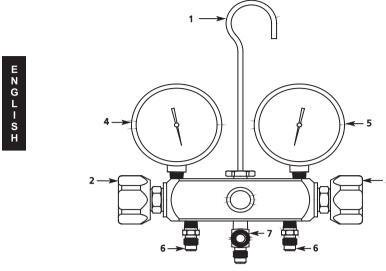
Repair Parts Illustration for Manifold Gauge Sets
